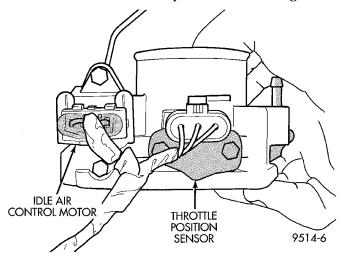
Idle Air Control Motor and Throttle Position Sensor—Typical
